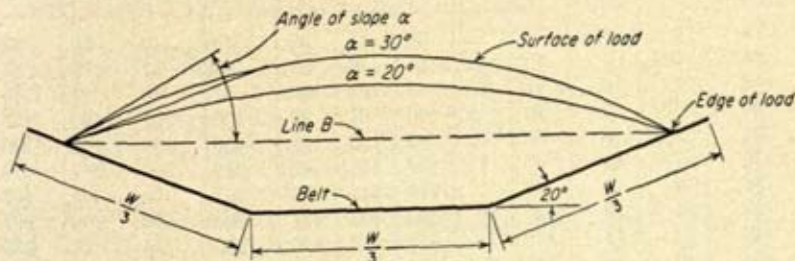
Cross-section area of a load on a conveyor belt.
